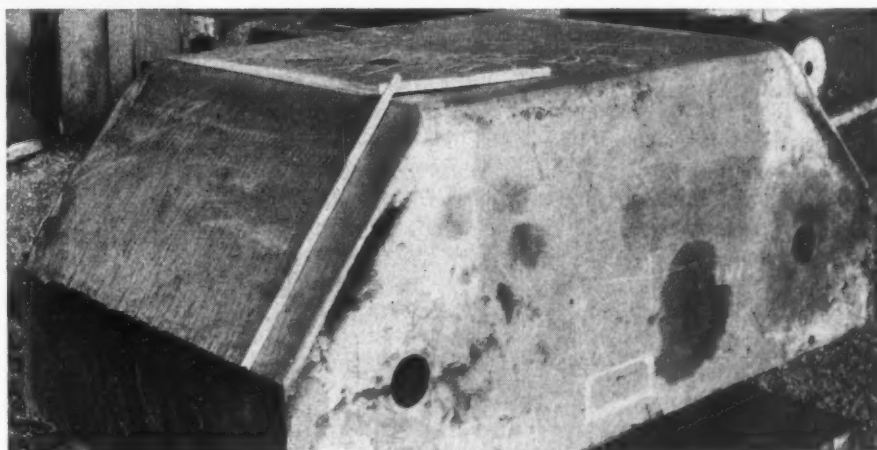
Right—Bevel cut 17.5 inches long on a heavy die block shows fine surface finish obtainable
